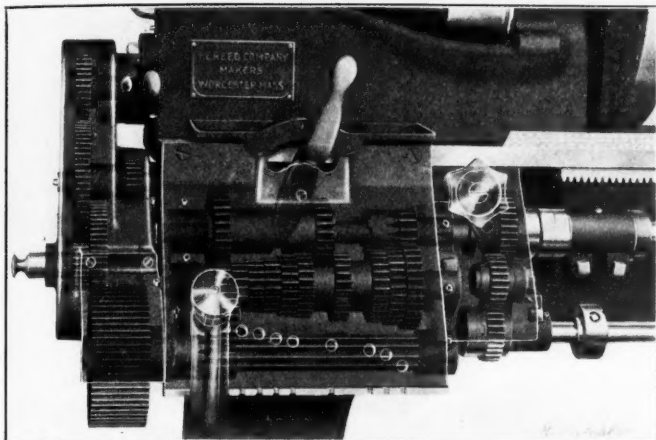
The Quick-change Gear Mechanism of the F. E. Reed Co.'s Lathe
